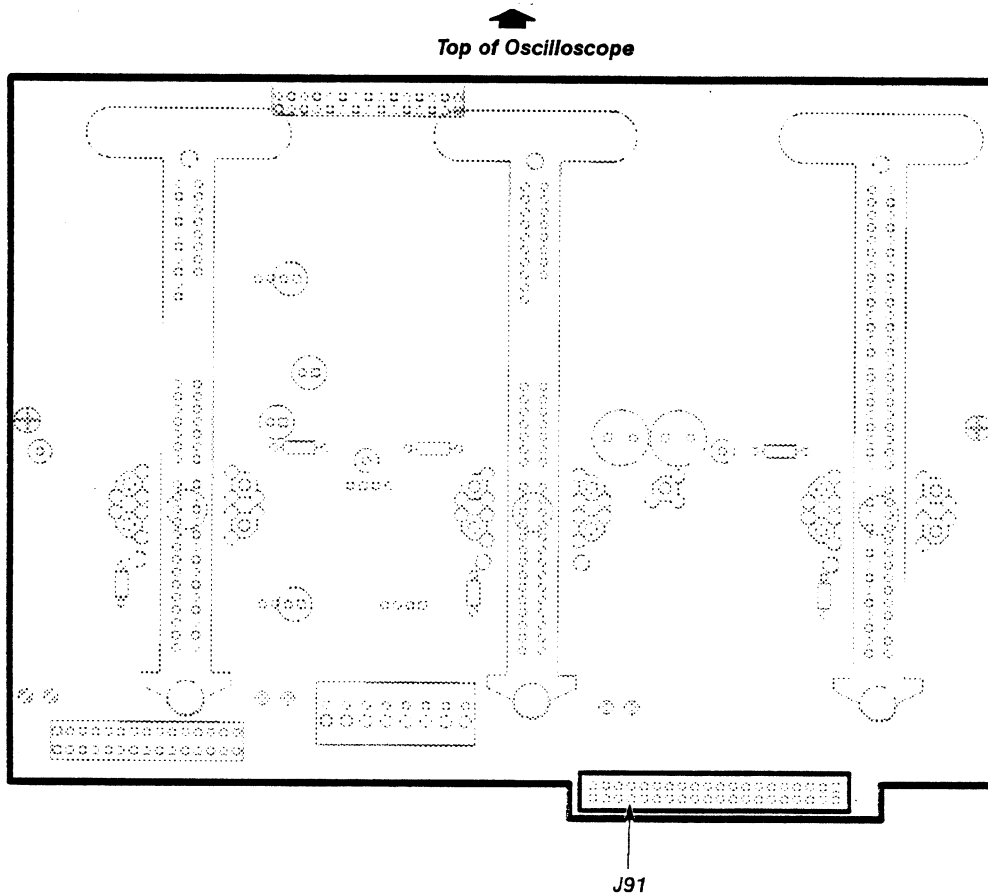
Removing/Replacing the A1 Plug-in Interface Board
